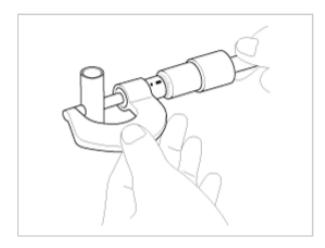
Measuring Piston Pin Outer Diameter Using Micrometer Courtesy of HYUNDAI MOTOR AMERICA
